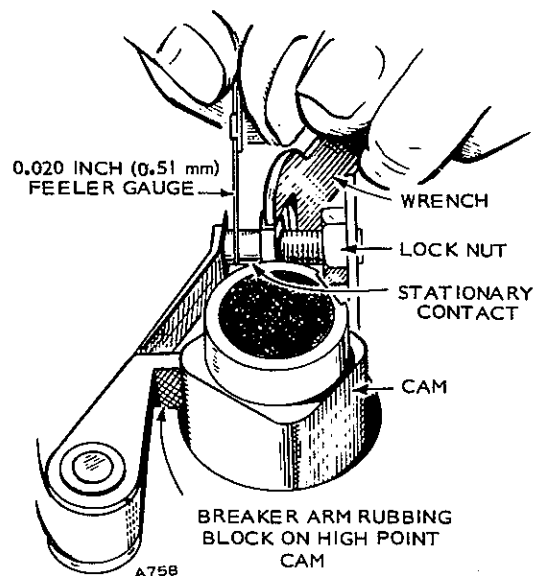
SETTING SINGLE BREAKER POINTS
